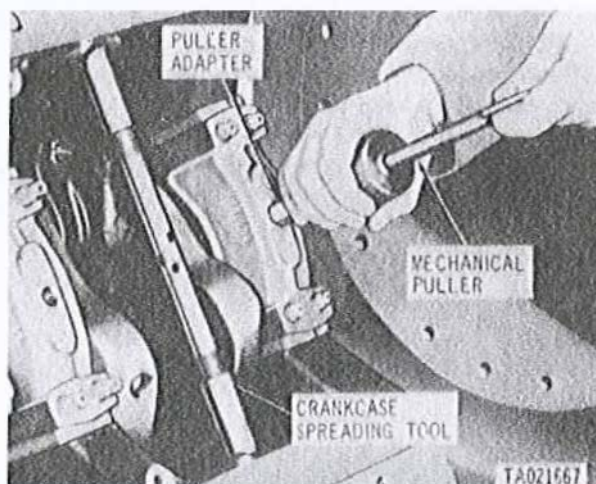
Removing main bearing cap using crankcase spreading tool, mechanical adapter and mechanical puller.
